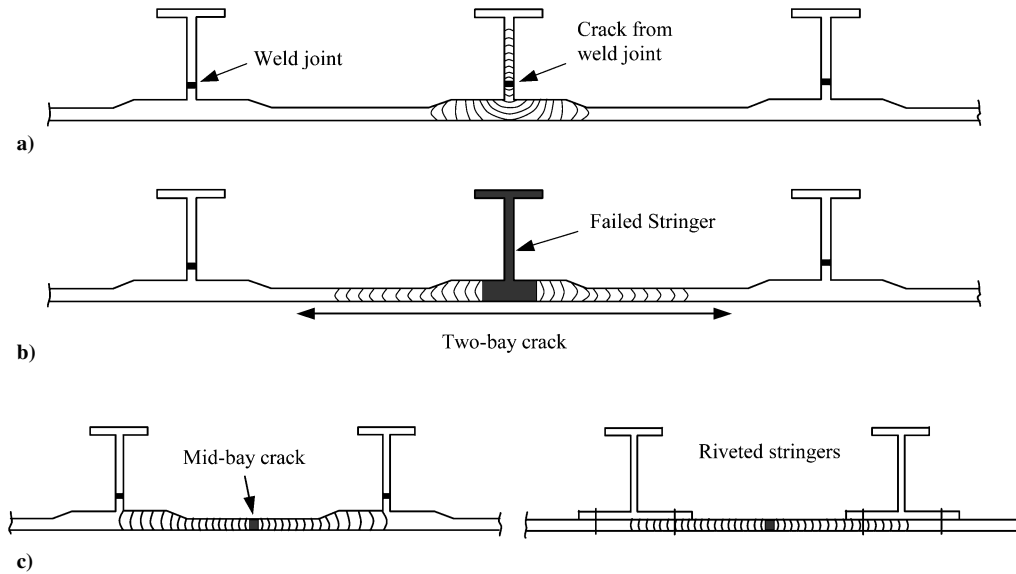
Failure scenarios: a) stringer failure due to initial flaws in weld joint, b) skin crack growth under a broken central stringer, and c) midbay skin cracks in integrally machined and riveted panels.
